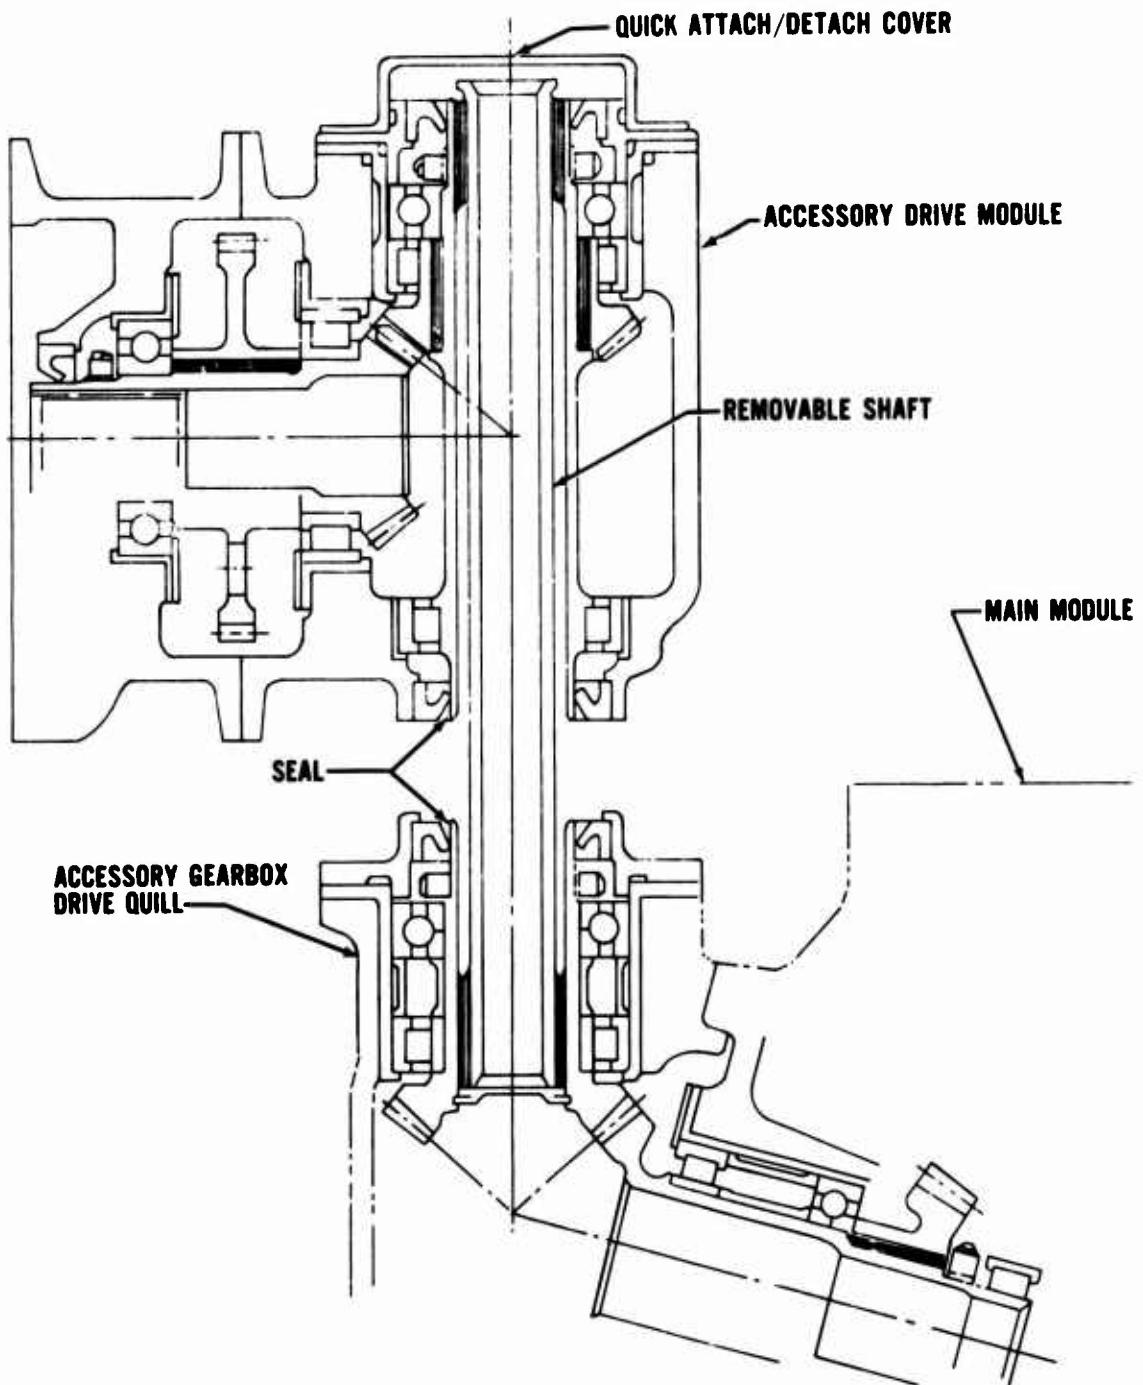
Sectional View Through Accessory Gearbox Drive Shaft of Modularized Main Transmission.
